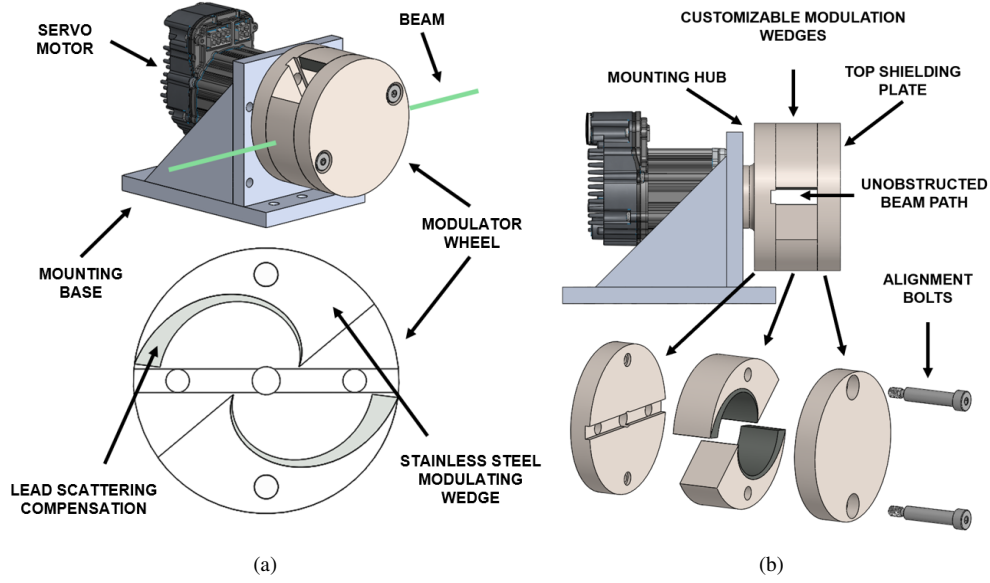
Final proton beam modulator design. The beam direction is depicted in green. (a) Isometric view (top) and cross-sectional view of modulator wheel (bottom). (b) Side view (top) and exploded view showing modulator wheel assembly (bottom).
